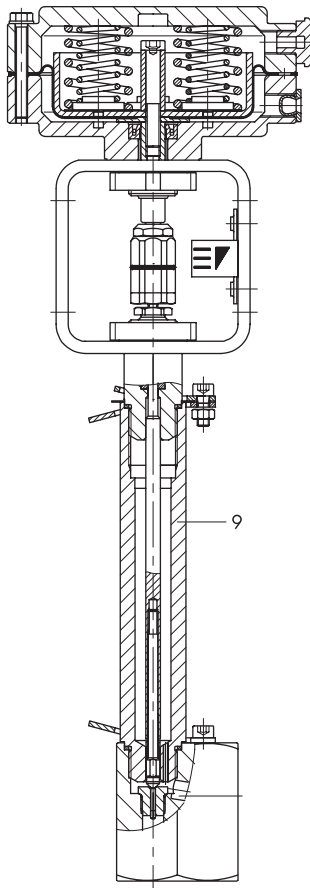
· Type 3510 Valve, angle valve with insulating section and Type 3271-52 Actuator (60 cm²)
